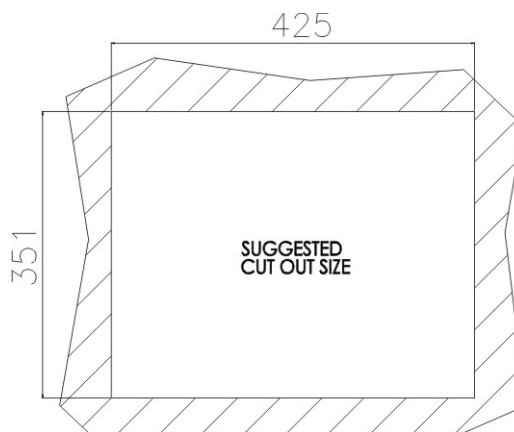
WIDS-517A-H61 Panel Cutout Dimensions
